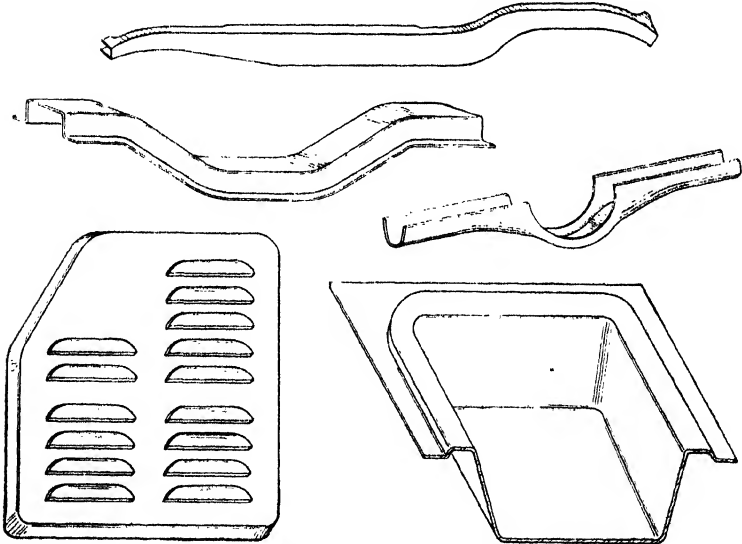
These heavy stampings (classification 7) include one with fairly deep draw and some of large area with shallow forms, one of which has lower openings.
